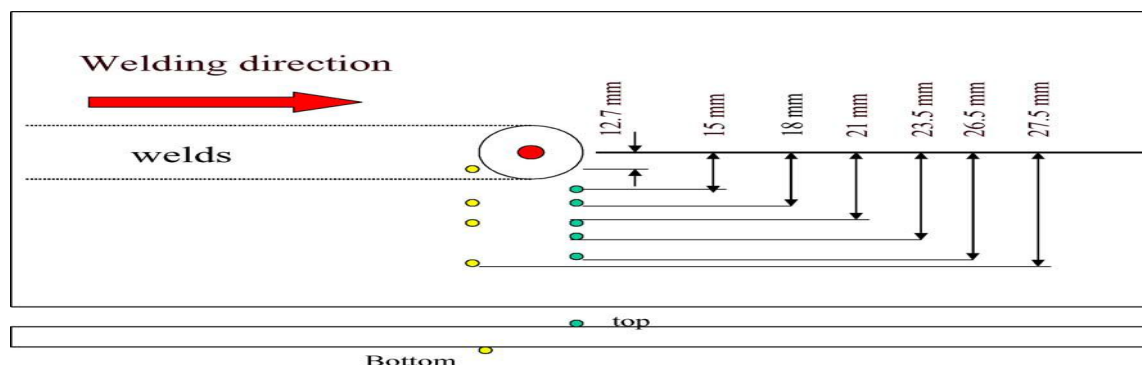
Location of thermocouples in friction stir welding (for the case of 300 rpm tool rotational speed).
